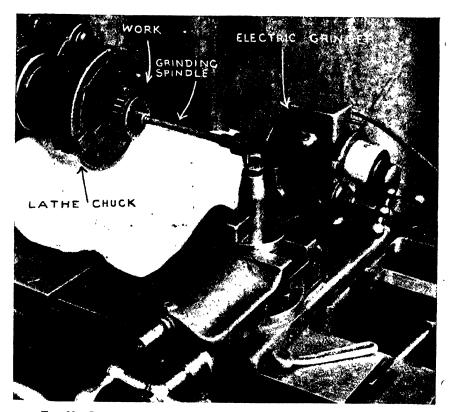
Internal grinding on the lathe, using electrical attachment
